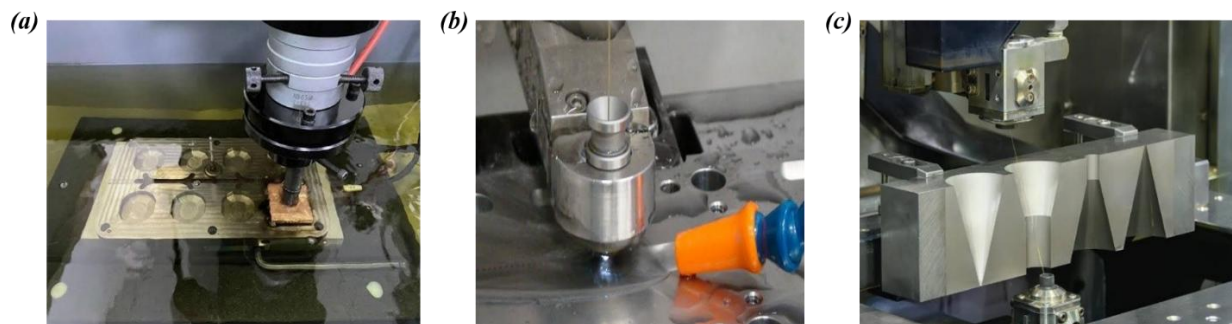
(a) Die-Sinking EDM (b) Hole-Drilling EDM (c) Wire EDM Schematic
